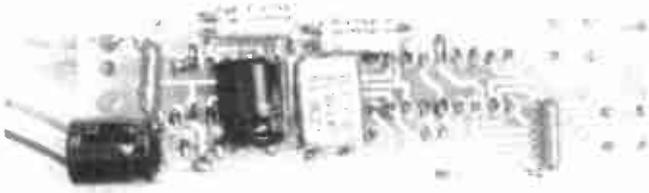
Component layout and full size p.c.b. for PIC-olo Music Maker.
